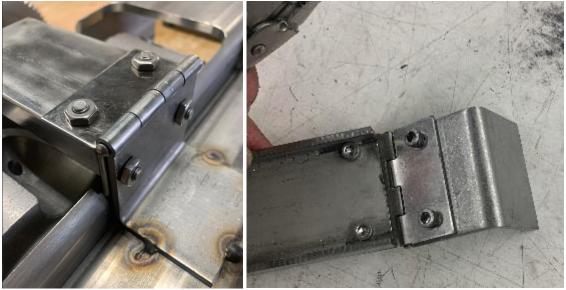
Assembled finger guard components (right). Finger guard welded to vacuum tubing (left).
